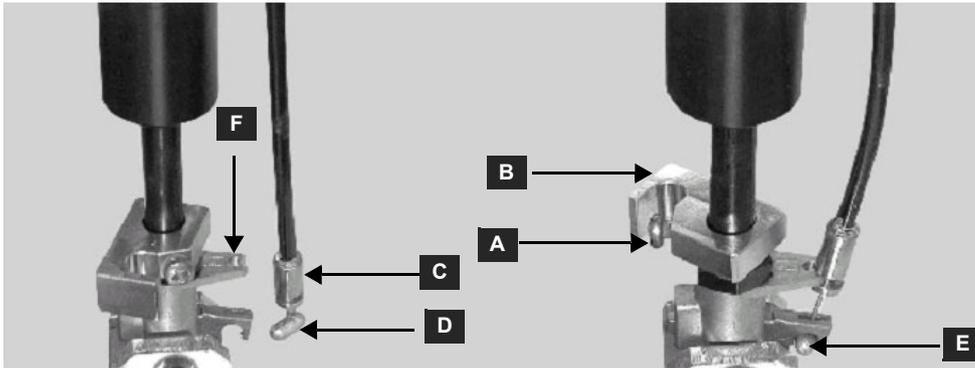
Gas Spring Lower End Cable - Close-up View
